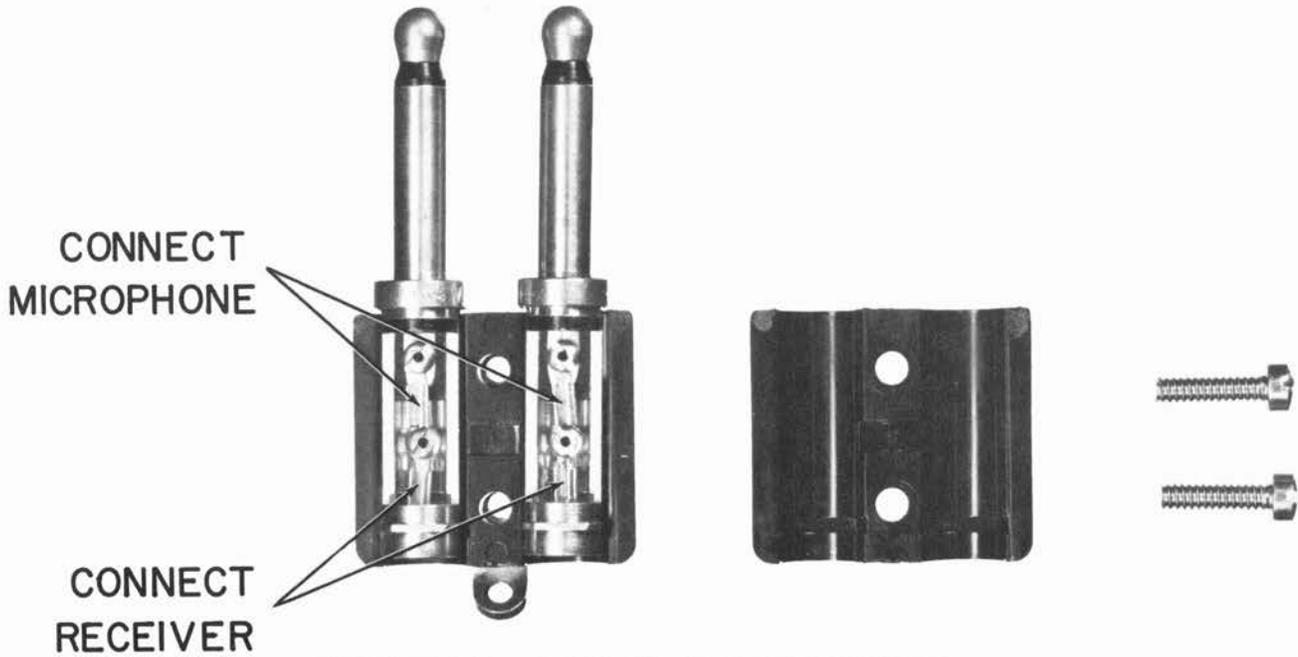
PHONE PLUG DISASSEMBLED
